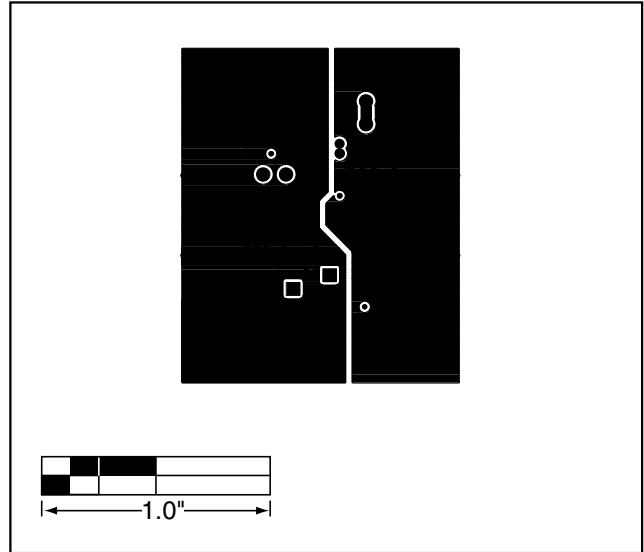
MAX2841 EV Kit PC Board Layout—Layer 3
